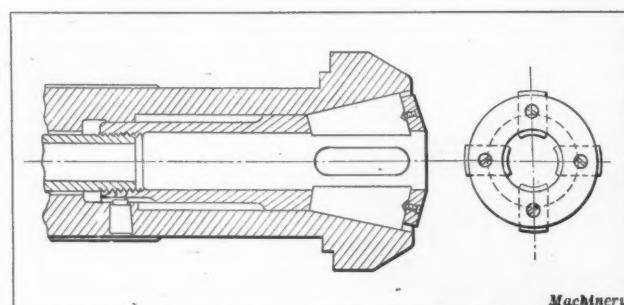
Construction of Chuck for holding Cutters with Short Straight Shanks
